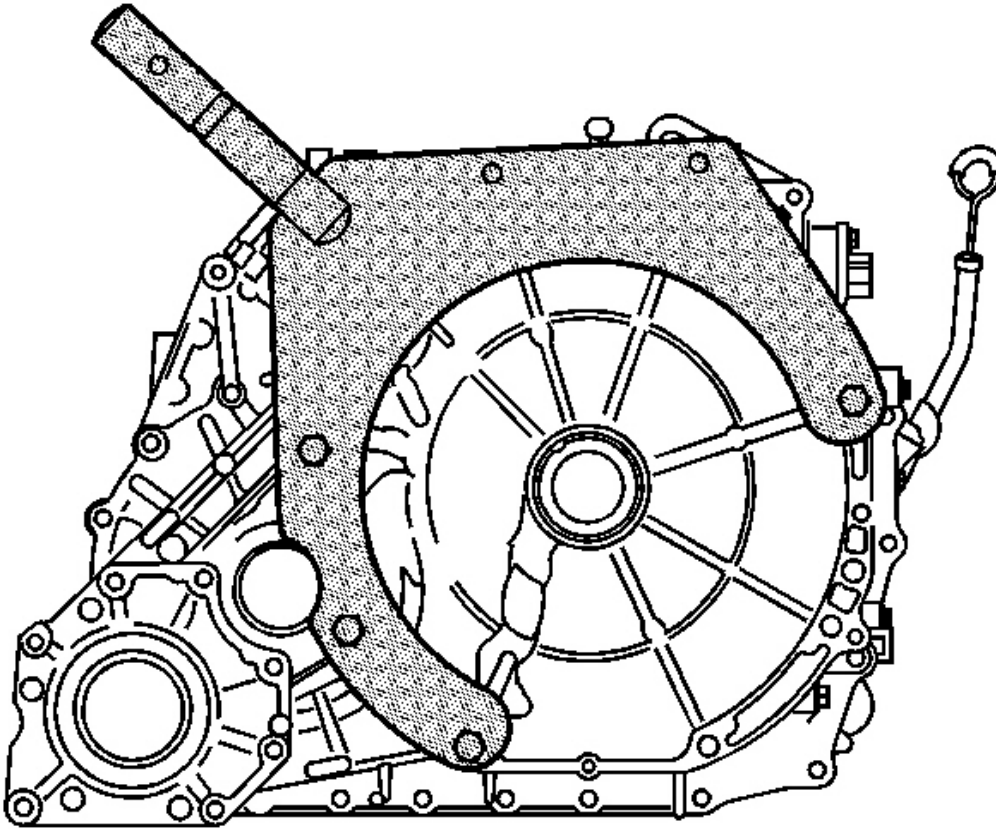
Attaching DT 46238 To Transaxle Assembly
